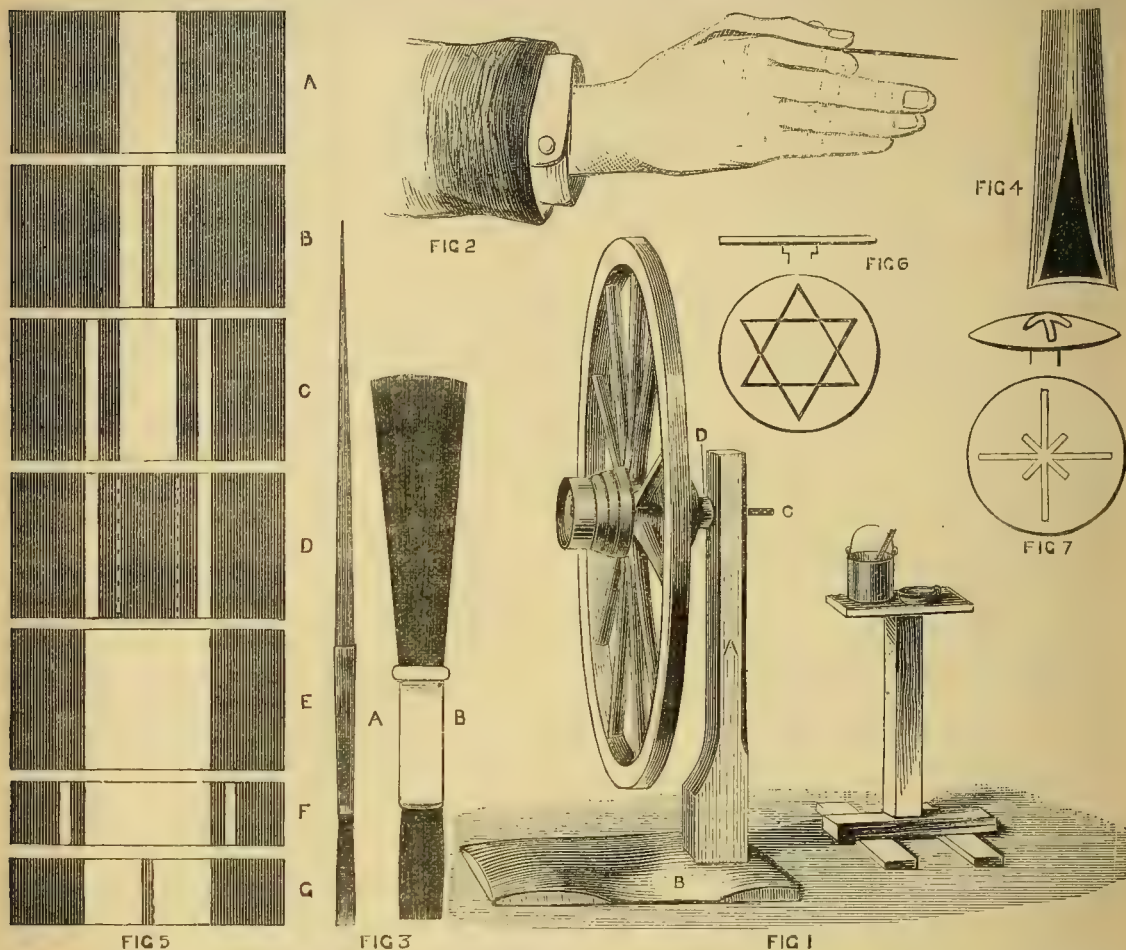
Sketch of Wheel Horse and Painter's Table (Dimensions of Wheel Horse: A, Upright, 3 ft. 4 in. high, 3 in. thick at top, $4\frac{1}{2}$ in. thick at foot; B, Base, 2 ft. long, 1 ft. broad, 2 in. thick near upright; C, Iron Rod, 14 in. long, 1 in. thick; D, Bobbin, 2 in. thick. If Naves have bolts through they will catch uprights unless there is a Bobbin. Fig. 2.—Right Position of Hand, showing how to hold Fine Liner. Fig. 3.—Liners: A, Fine Liner, with piece of wood to make it longer; B, Broad Liner. Fig. 4.—Lining on face of Spoke. Fig. 5.—Linings on Spokes: A, Centre line blue, green, yellow, or vermilion, on black or dark ground; B, Centre line, with fine line in middle of the same colour as spoke, making broad line look like two fine lines, and line to be put on the wheels, etc., first, when dry the fine line is put on; C, Centre line, with two fine lines at each side (this lining is the most difficult of all); D, Two fine lines: if on a coloured spoke the space between should have a broad line of black, as shown by dotted lines; E, Broad line: if on a wheel painted vermilion it should be black. On black it should be tan colour, or a very light brown, as these are the only two colours which can be lined so broad as they will not appear showy. This broad line can also have a fine line at each side as at F, or in the centre of broad line, as at G. Fig. 6.—Lining on Cheese-headed Bolts. Fig. 7.—Lining on Common Bolt Head.
